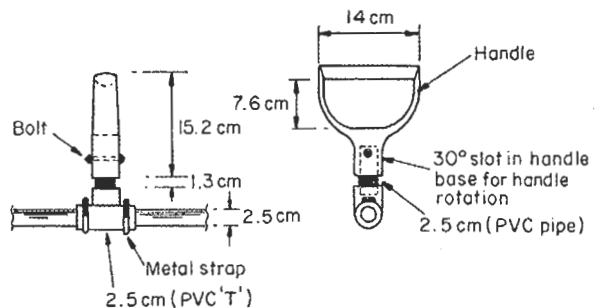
Detailed design of the secondary shaft of the modified shovel (dimensions in centimetres)
